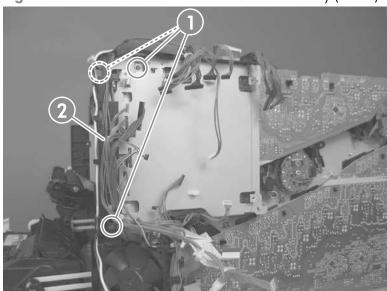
Remove the DC controller PCA and tray (3 of 4)
